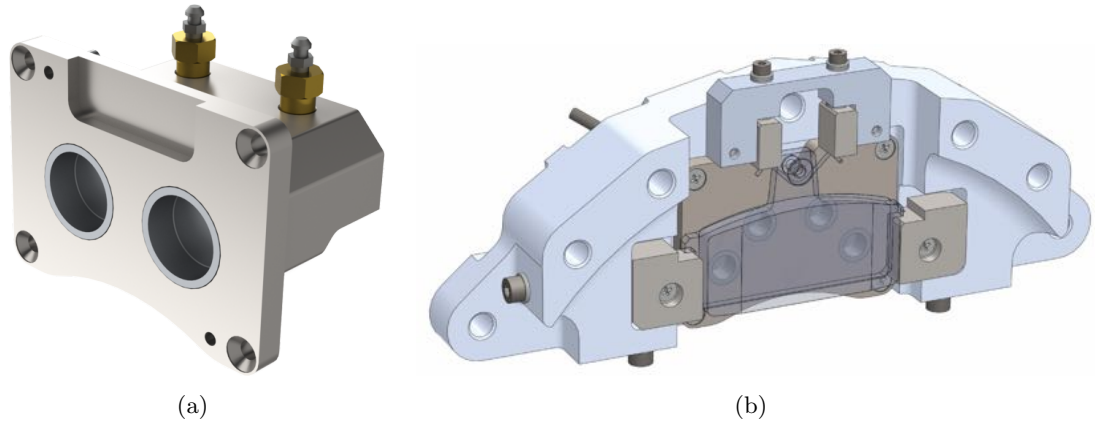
CAD model of piston module: (a) with two pistons, (b) with four pistons - in assembled position.
